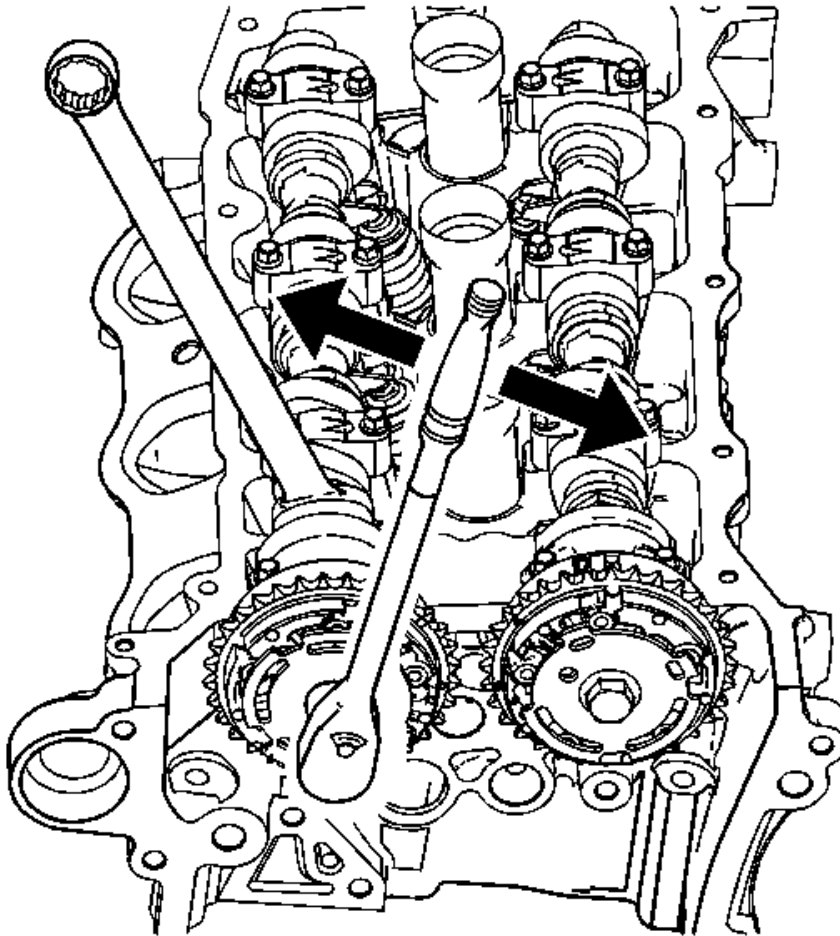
Preventing Camshaft/Engine Rotation Using Open-End Wrench
